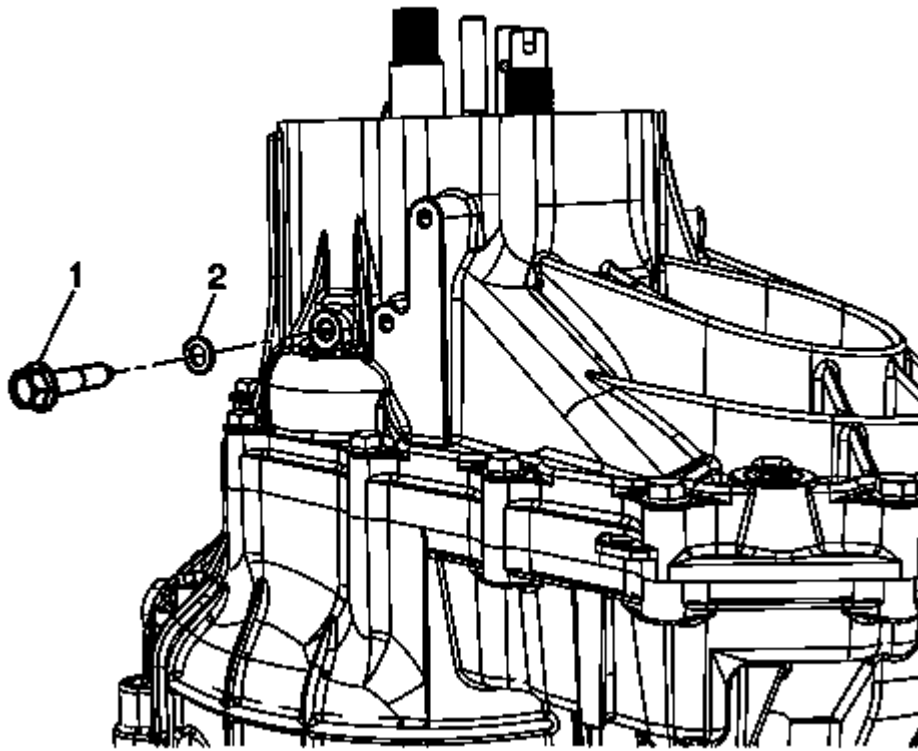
Reverse Idle Gear Shaft Bolt And Gasket
